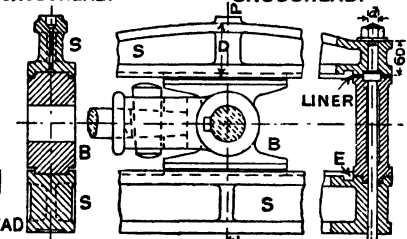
& 1217. C.I. ADJUSTABLE CROSSHEAD.
